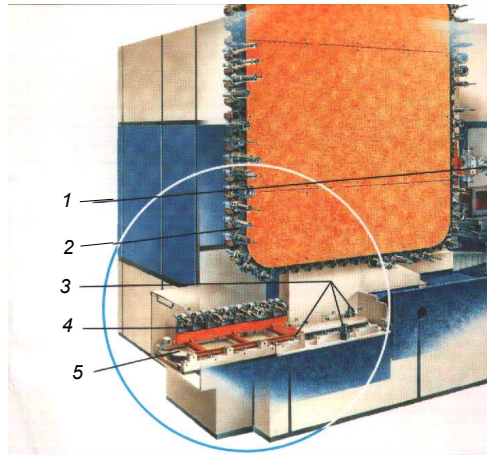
Exchanging the tools in tool-storage matrix using multi-tool cassettes:
